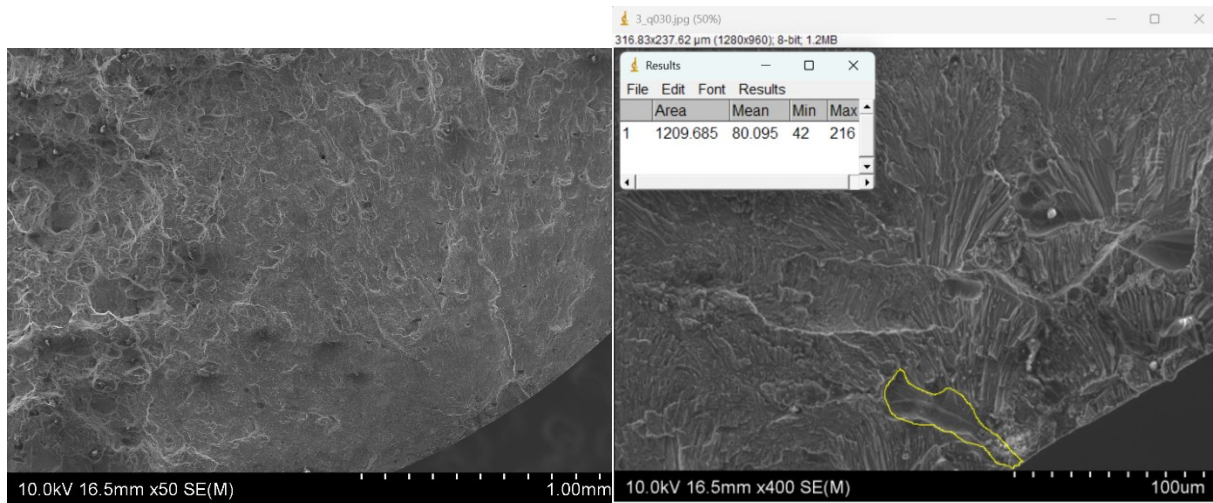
Fracture surface of sample CD//BD-AB-4 a) x50, b) x400.
